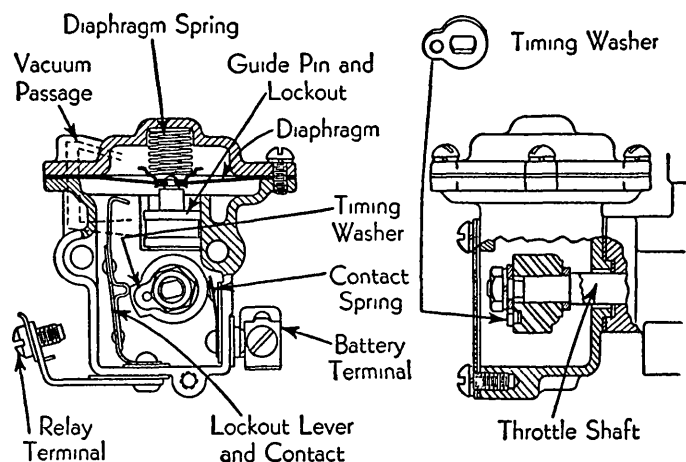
Delco-Remy direct operated carburetor mounted vacuum switch. Buick 1940-47
